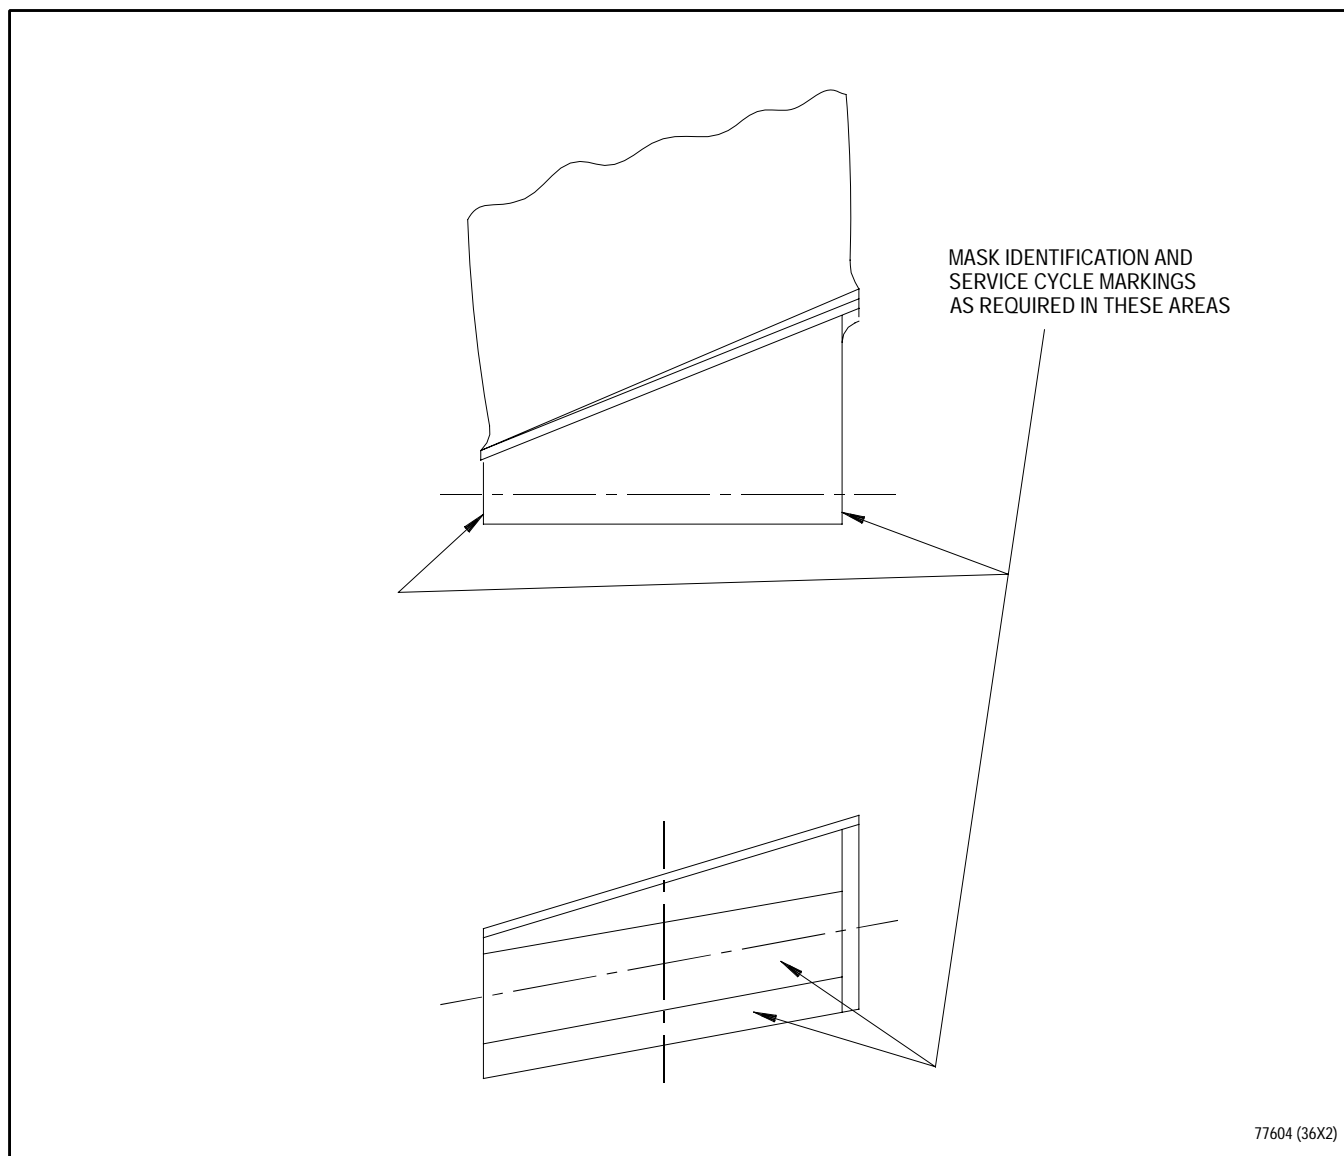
Compressor Rotor Blades (Stages One Through Three) - Masking Identification Areas
